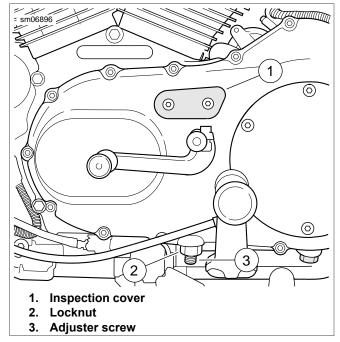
Primary Chain Inspection Cover and Adjuster
